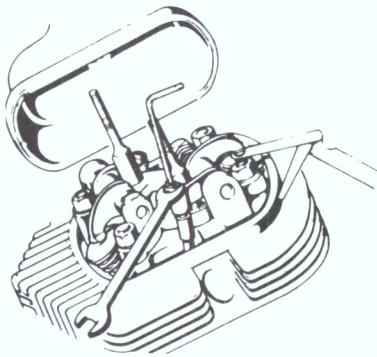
Loosen lock nut and use a 5mm Allen wrench to adjust valve clearance. Engine should be cold to perform clearance check.
